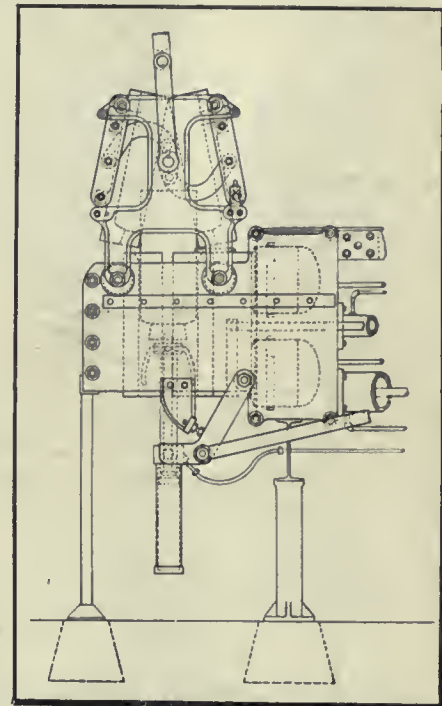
VIEW OF PRESS SHOWING INGOT PARTLY LOWERED INTO THE DIES.
